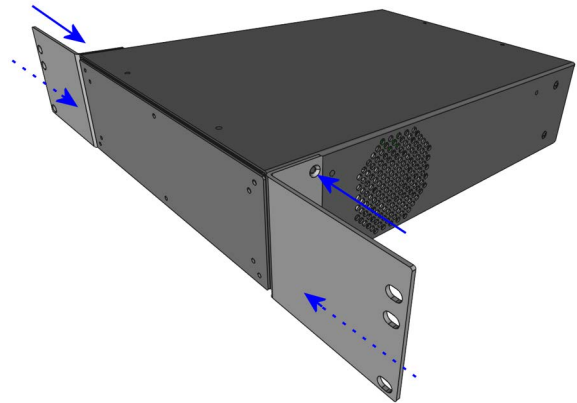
Mounting the 19" rack-mount kit to a DN2 chassis
